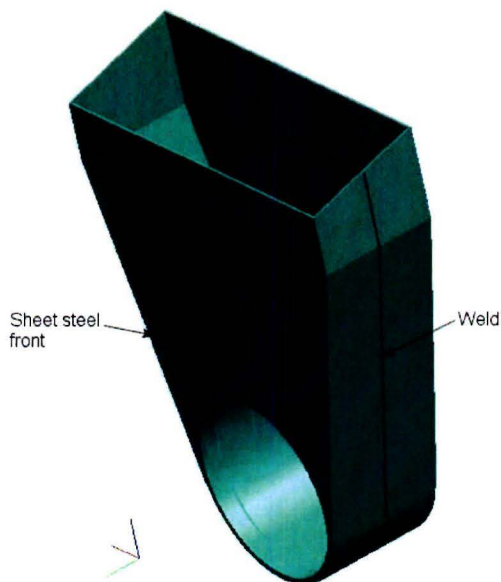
Wheel carrying arm: steel tube with two pieces sheet steel
